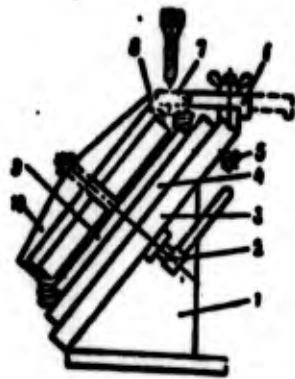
Diagram of a turning jig: 1 - casing; 2 - lock; 3 - fixed disk; 4 - mobile disk; 5 - index pin; 6 - shoe; 7 - jig bushing; 8 - part to be machined; 9 - support element; 10 - clamp.
